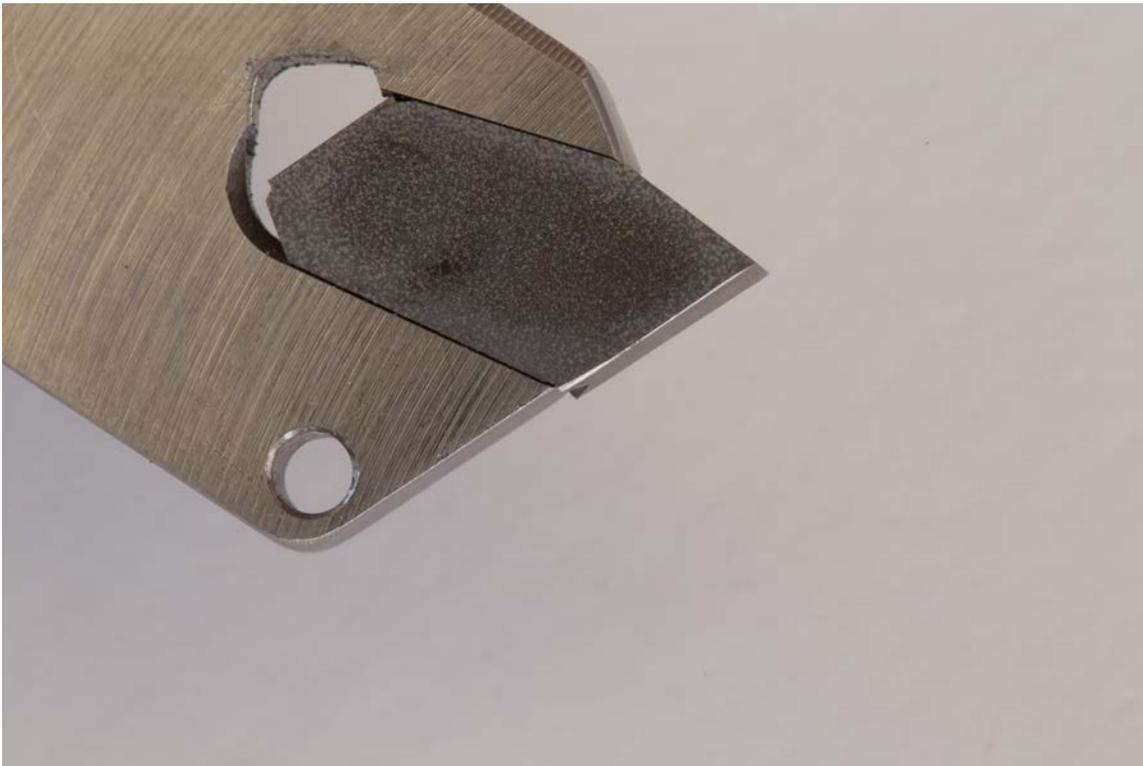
The replacement cutter is positioned in the tool as shown. No force is needed to get it to the proper position for seating with the EWT Flex Key as it easily slides into place.
